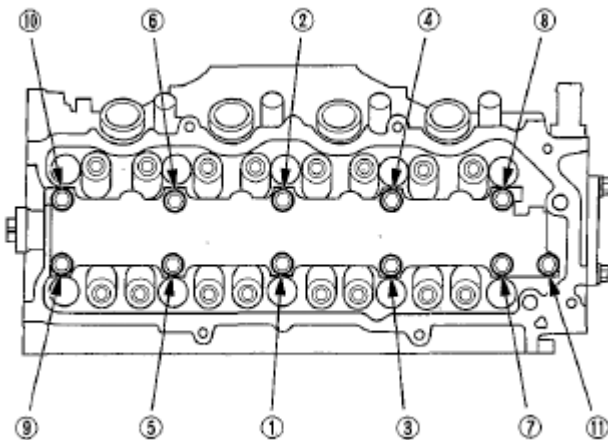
Identifying Cylinder Head Bolt Torque Sequence
